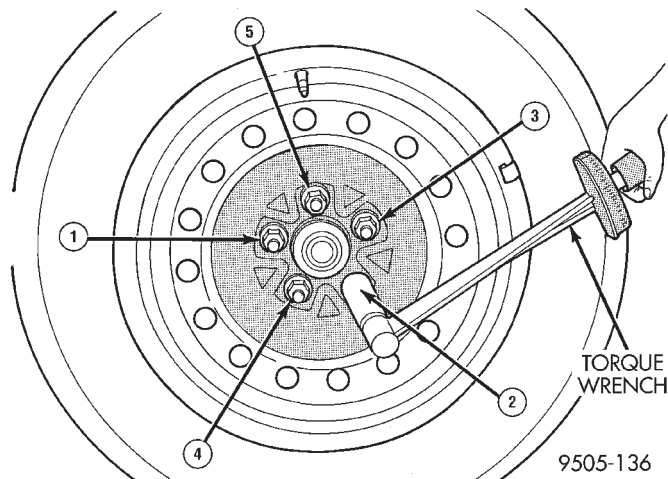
Five Lug Wheel Nut Tightening Sequence
